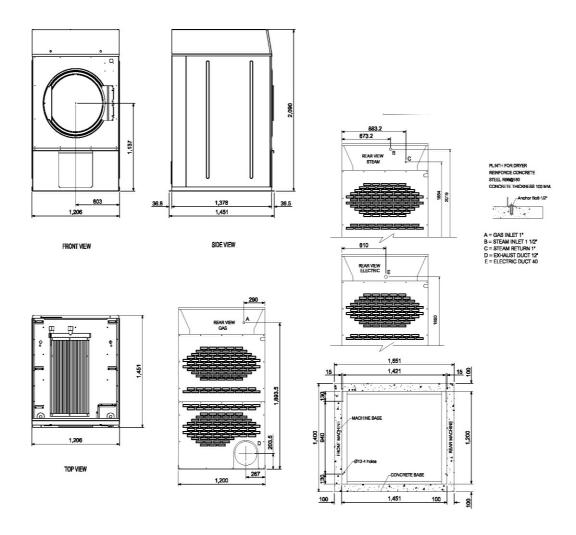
Dryer Model 100 lb. Technical Dimension
